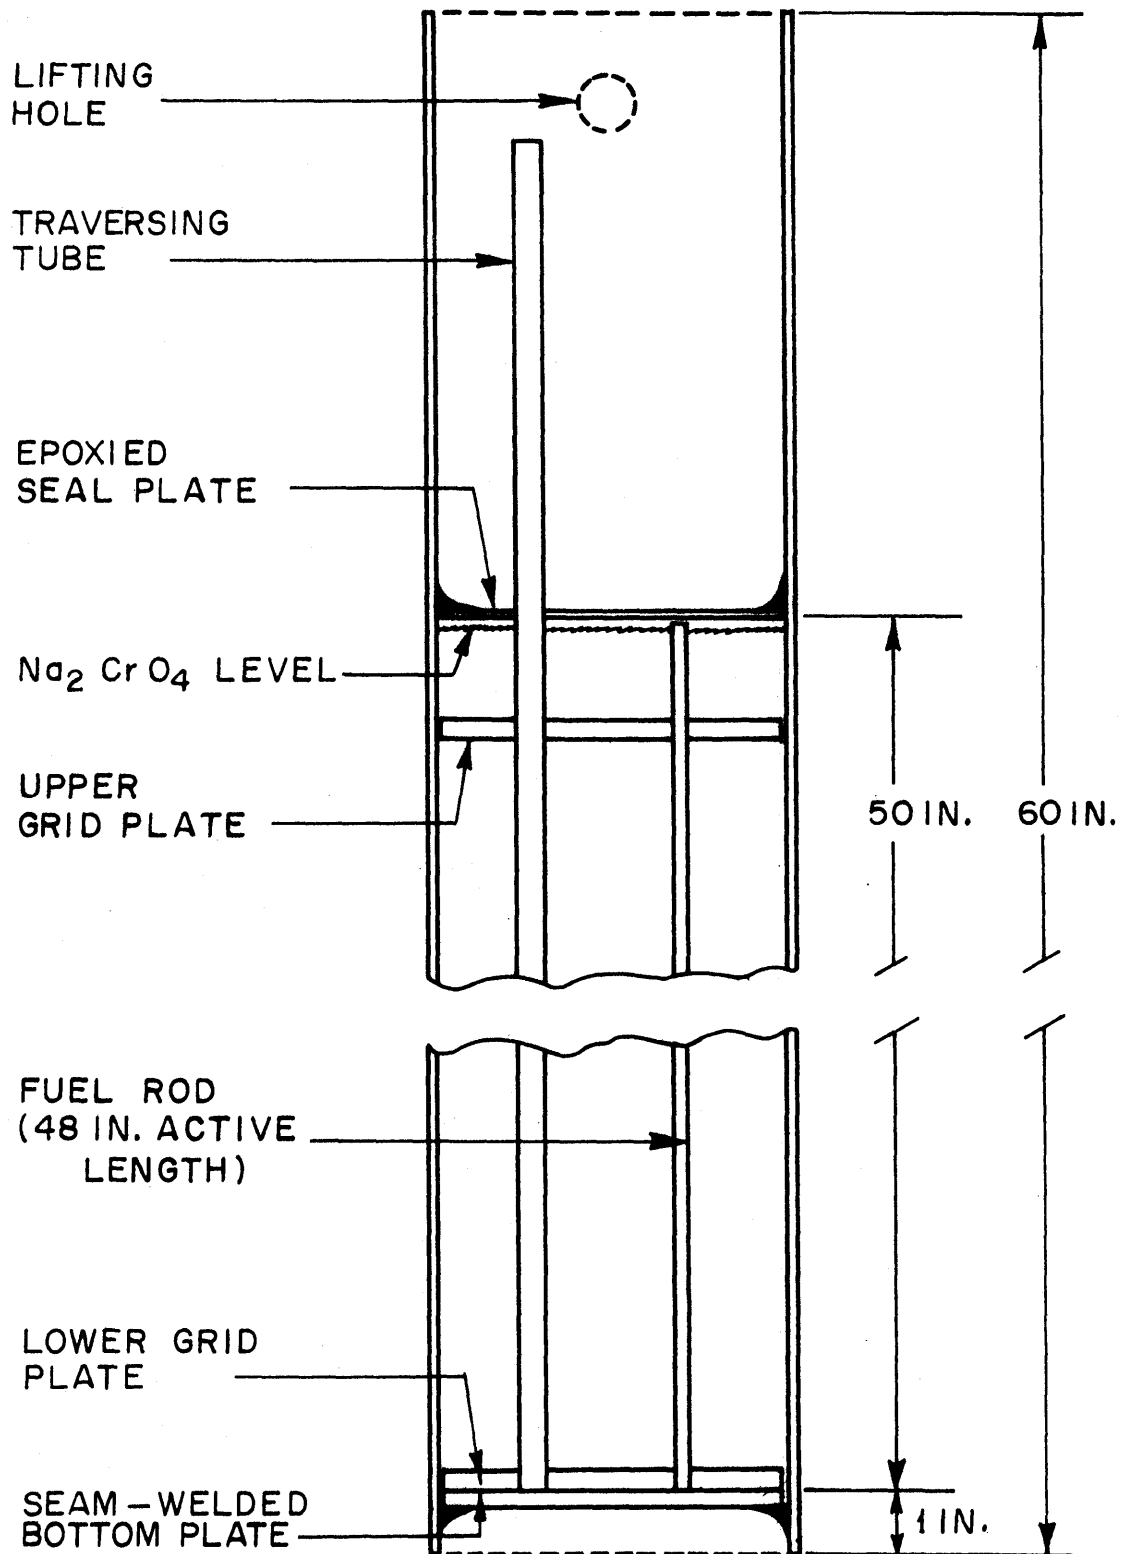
SCHEMATIC CROSS SECTION VIEW OF BLANKET NO. 3 SUBASSEMBLY
